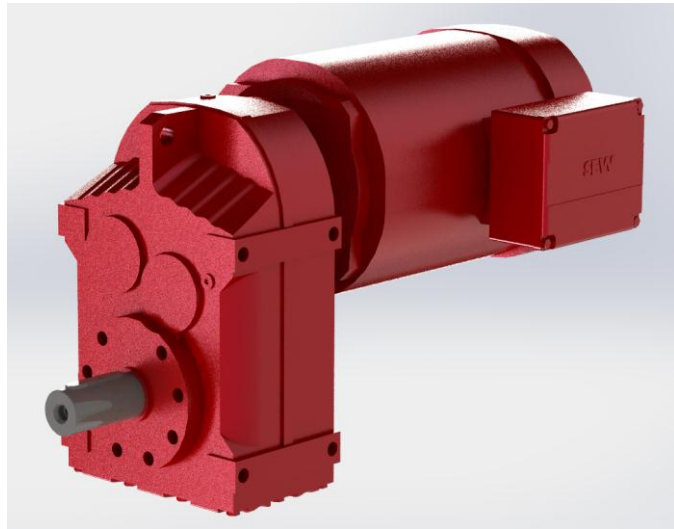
SEW Eurodrive parallel shaft helical gearmotor, F series
